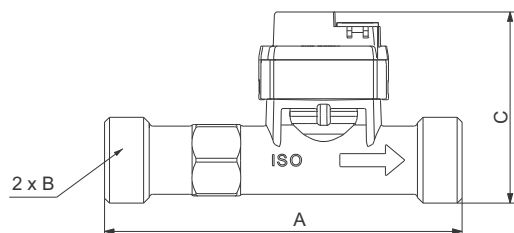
Dimensions, VFS QT, 2-40 l/min, with threads
